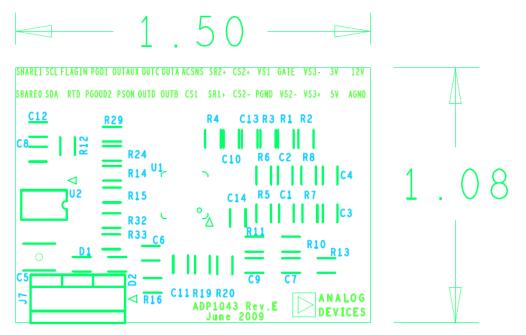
Figure 53 - Silkscreen Layer, dimensions in inches
